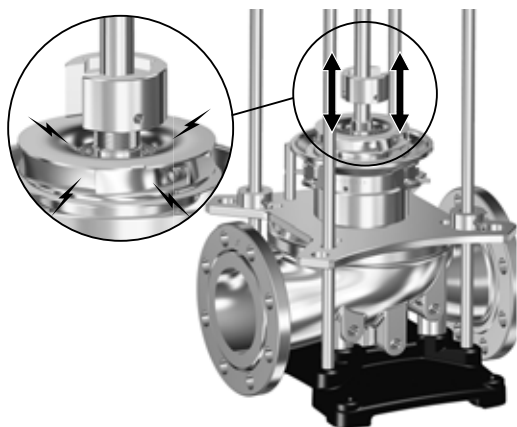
Fixating the impeller (49 or 49a) to the pump shaft (51) with service tool C
